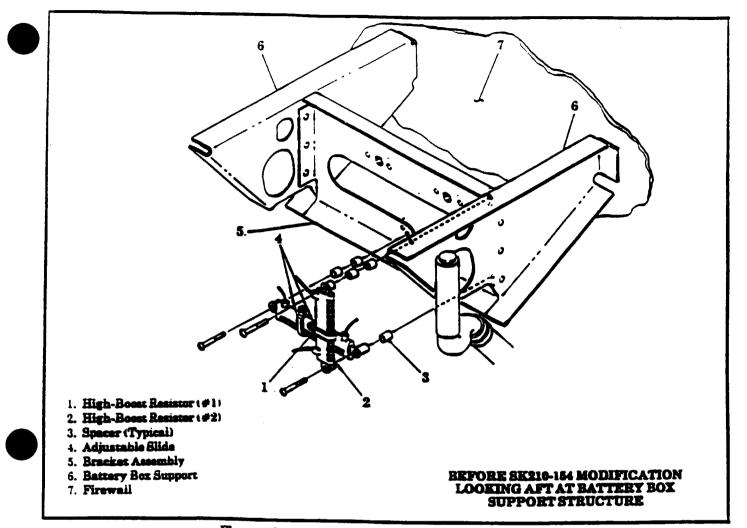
Auxiliary Fuel Pump Resistors (Sheet 1 of 2)
